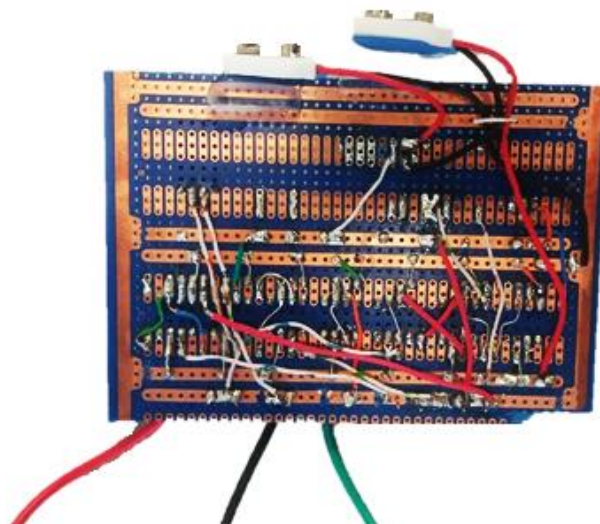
Back side of the Potentiostat board showing the connections of wires and solder.
